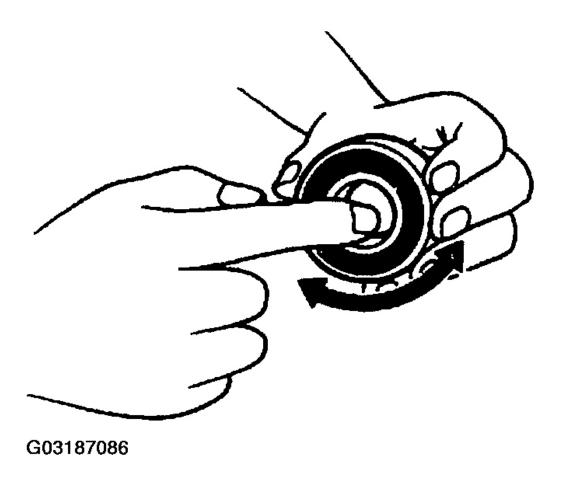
Inspecting Bearing For Damage & Rough Rotation Courtesy of MAZDA MOTORS CORP.
